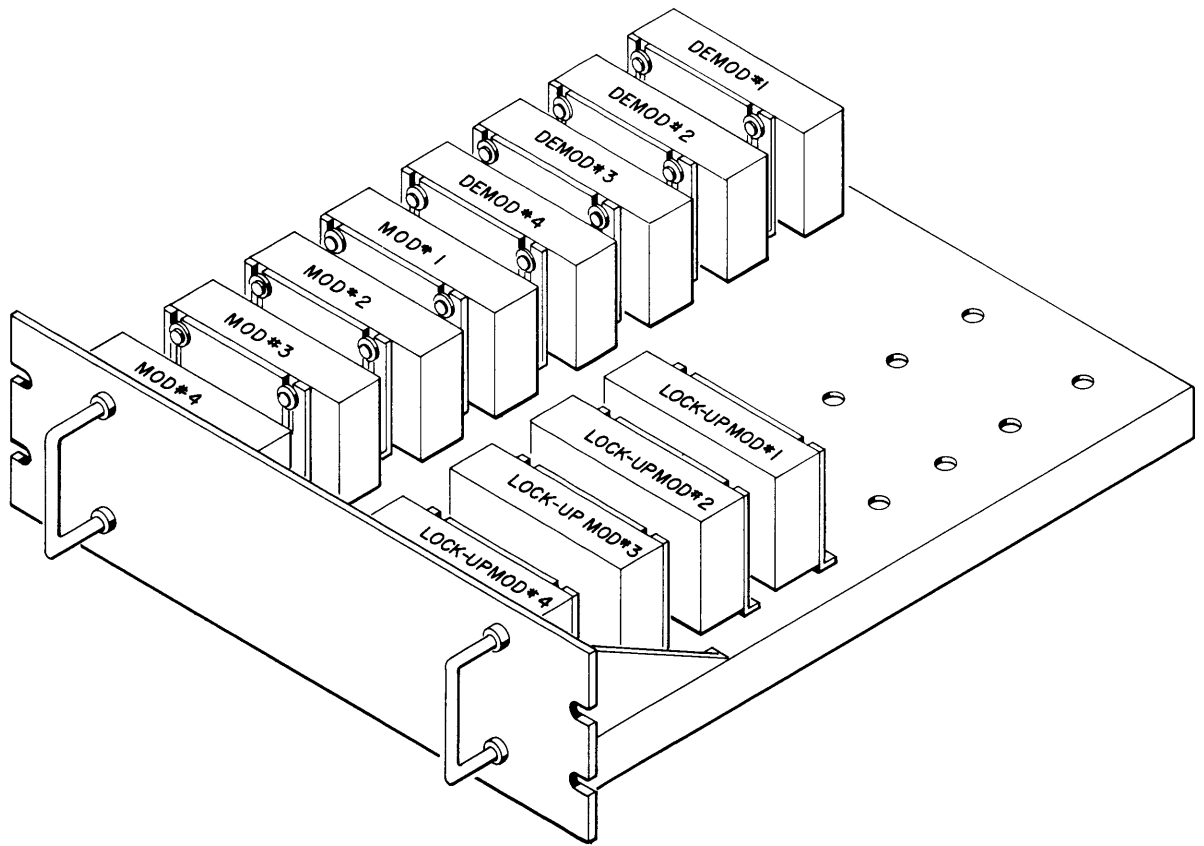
KW-37 RED Tone Converter Drawer, Isometric View
